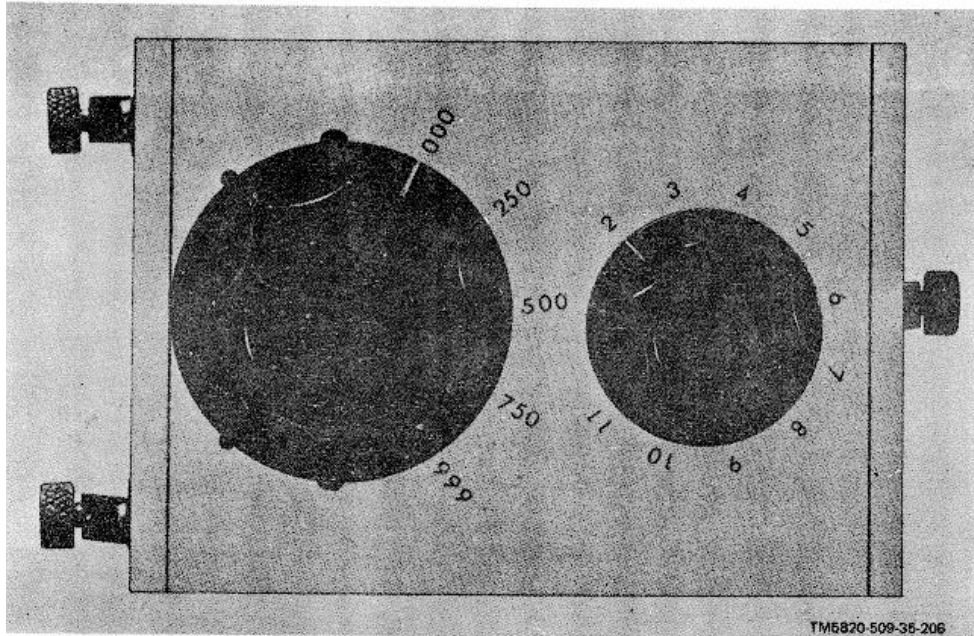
Indexing Fixture for CV 1377A/PRC, Suggested Layout.
